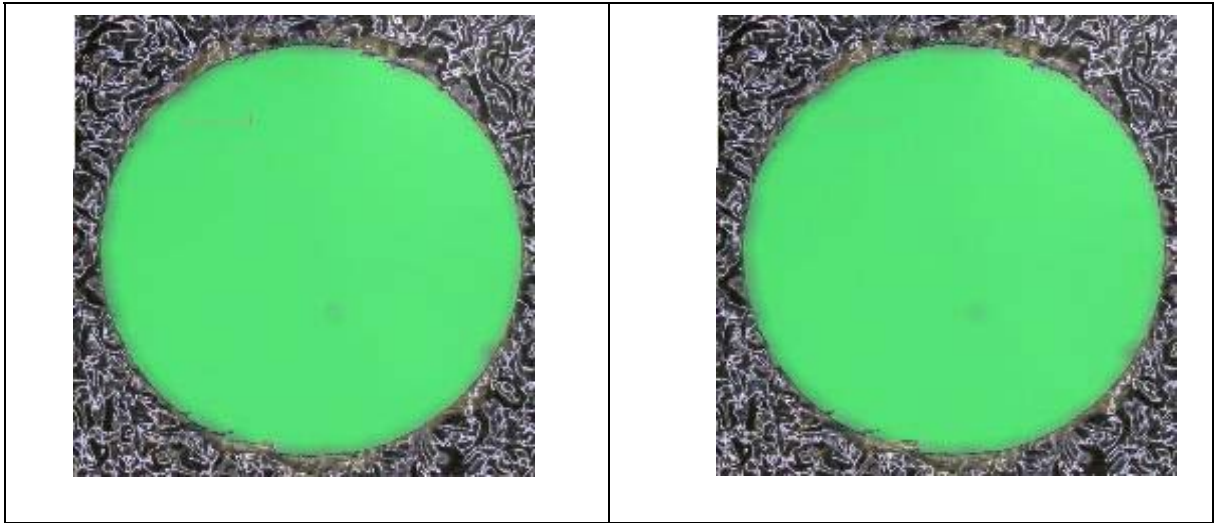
Hole 60, bag side of the laminates: traditional tool T, process condition C (6000 rpm – 0.15 mm/rev).
